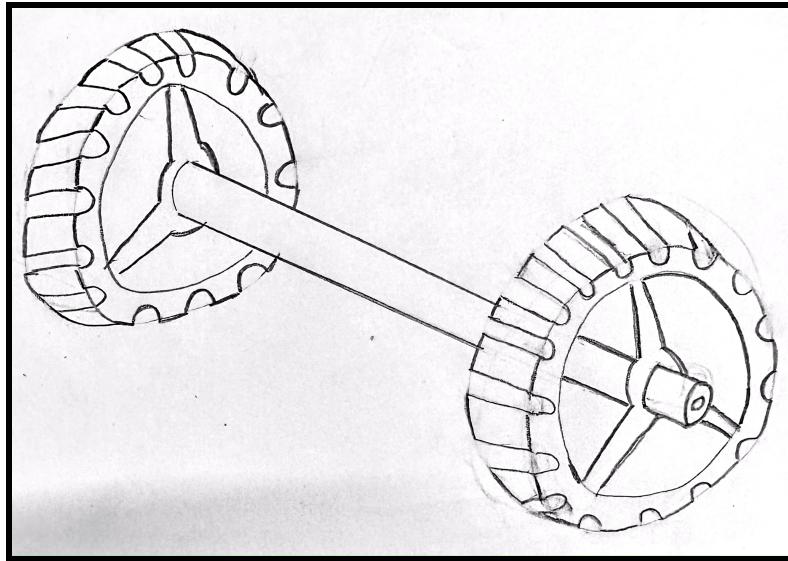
The Sketch of Wheel Assembly with Axles
